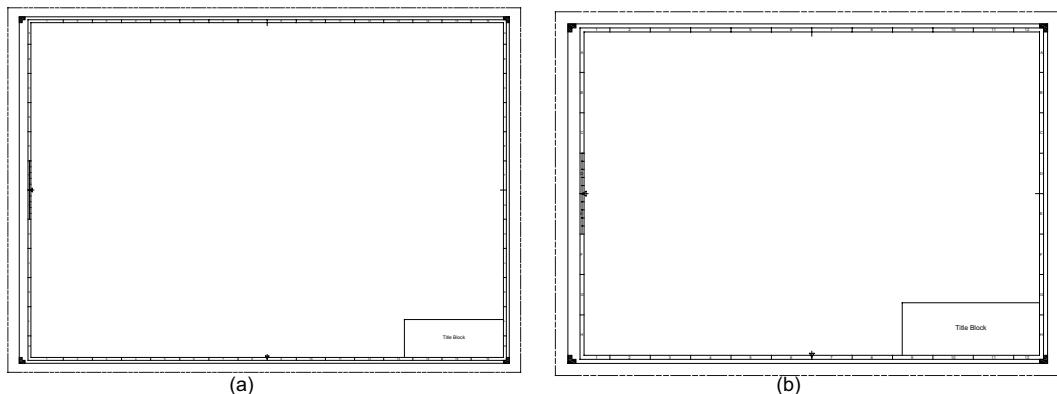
Planning and layout of drawing sheet for (a) A1 size (b) A2 size
